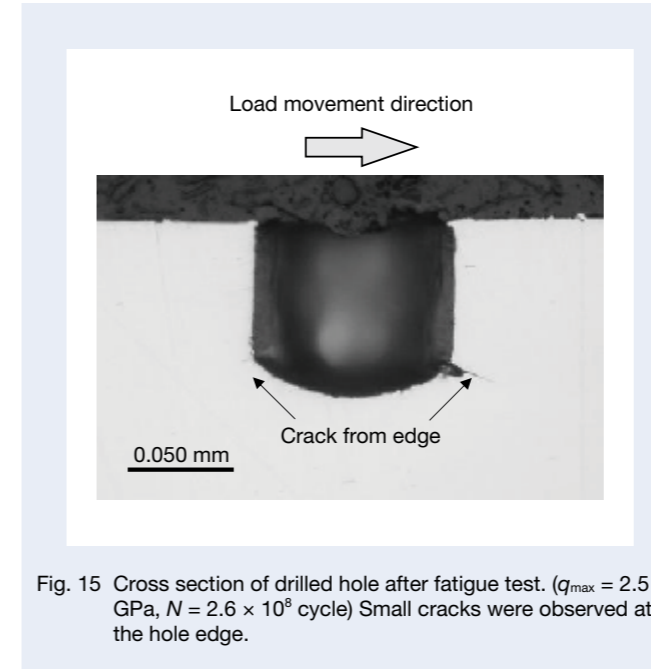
Cross section of drilled hole after fatigue test. ($q_{max} = 2.5$ GPa, $N = 2.6 \times 10^8$ cycle) Small cracks were observed at the hole edge.
